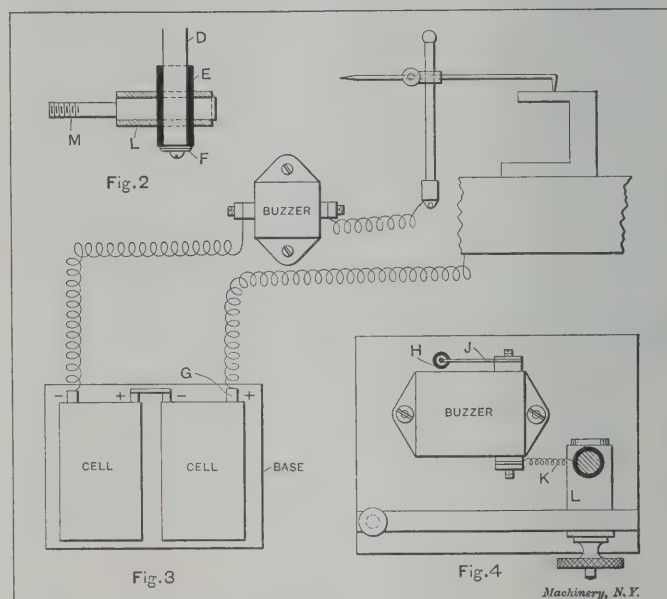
Diagram showing Electrical Connections and Plan of Gage
